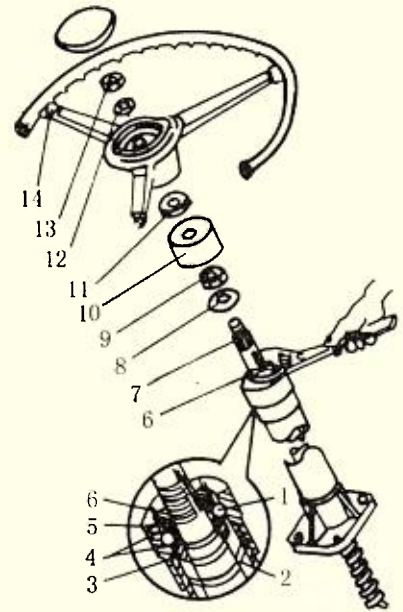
4 Adjustment of thrust bearing of steering column
